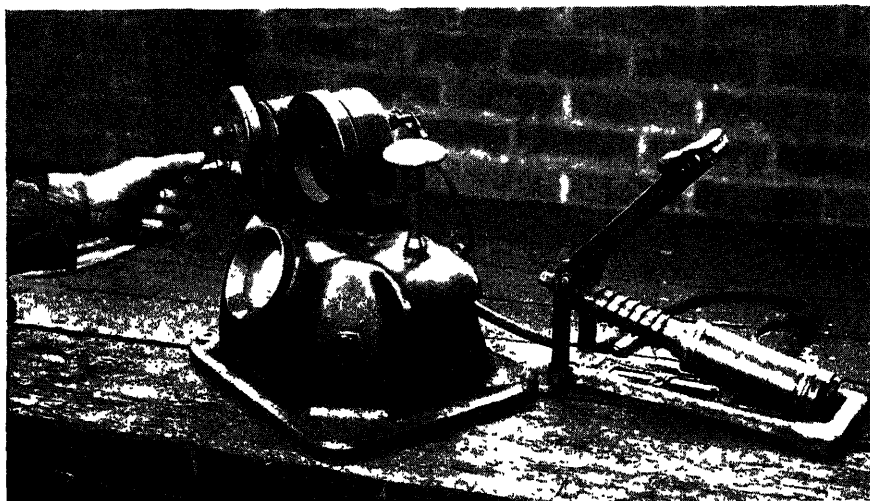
25-HOUR ROUTINE INSPECTION (4)
